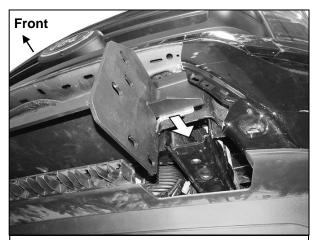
Attach steel bumper brackets and Winch Tray Bracket Assembly to factory bumper. NOTE: Plastic Retainers used to hold Bolt Plates in place.
